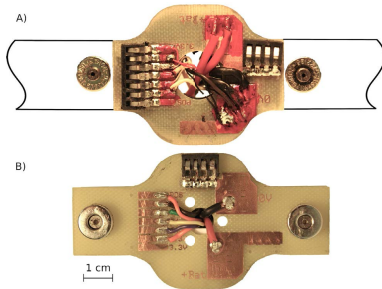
Magnetic docking mechanism. The top and bottom photographs are the docking parts of the upper arms. A) Printed circuit board (PCB) and magnets directly glued to the upper arm. B) PCB equipped with complementary magnets screwed down to the upper part of the scissor joint.
